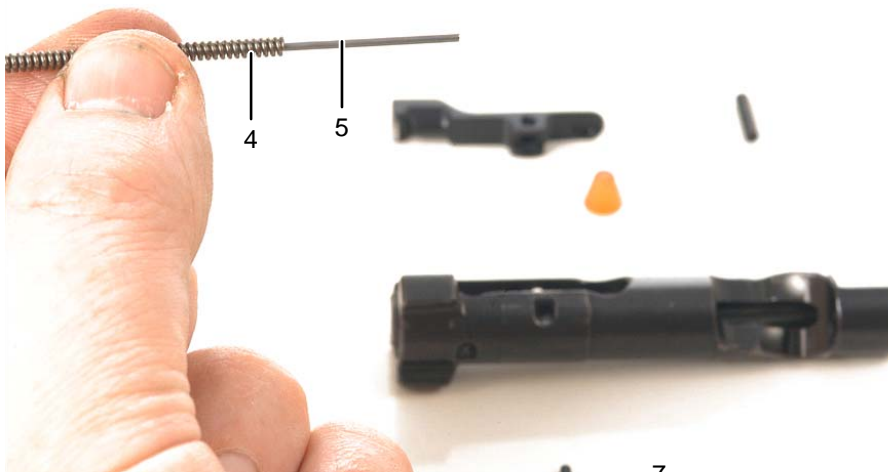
Inserting the Ejector Guide into the Ejector Spring
